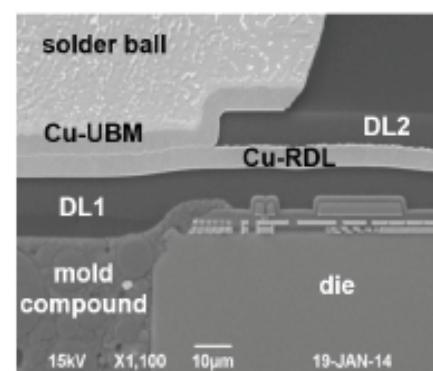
Cross section of the final package showing the die, molded fan-out area, RDL-stack with UBM, and solder ball.
